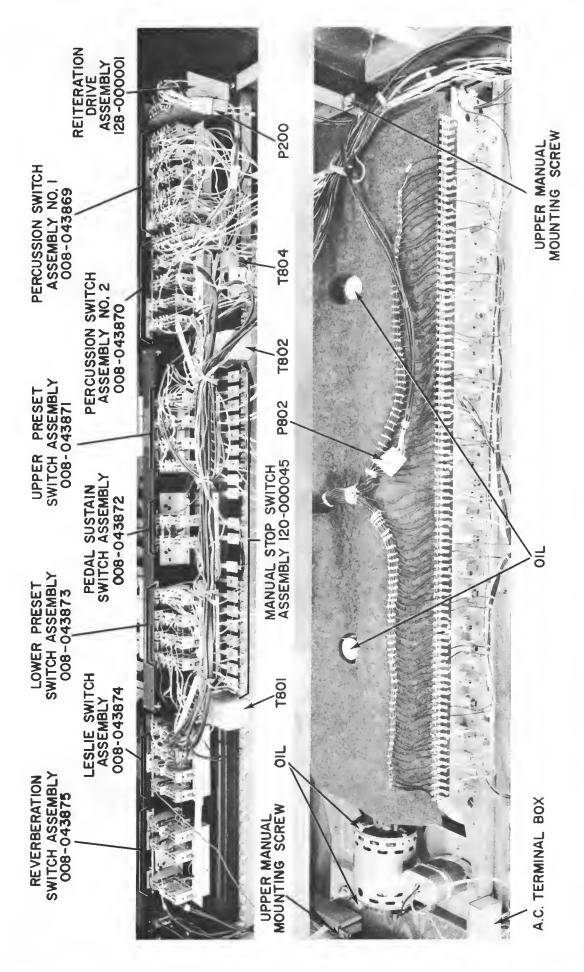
Parts Identification and Lubrication Points, Rear of Console
